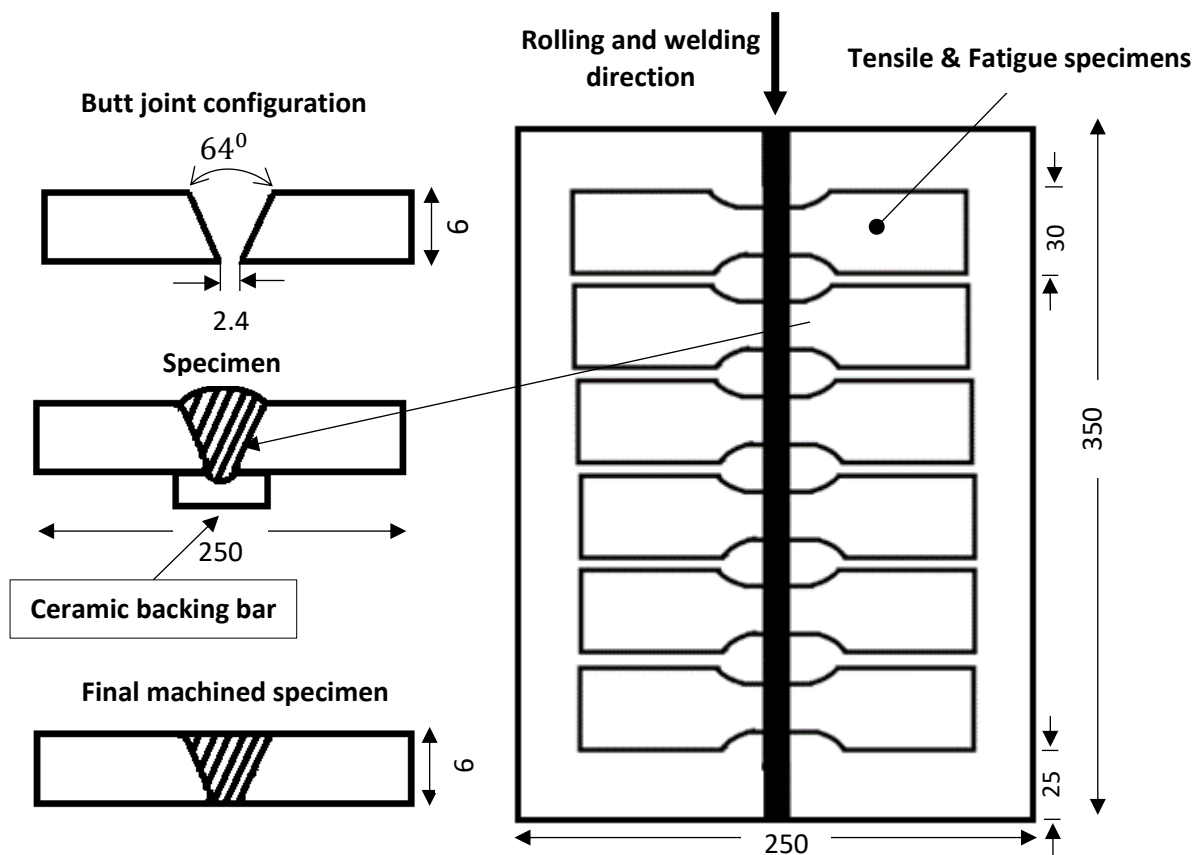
Details of butt-welded joint specimens extracted from the welded plate
